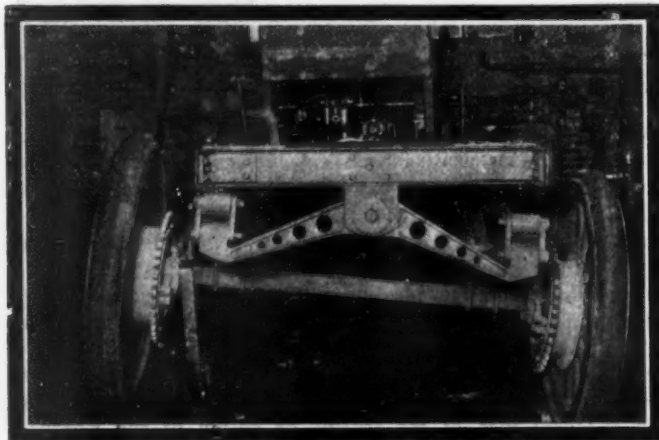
Rear spring equalizer on the Harder truck, showing a level platform with one wheel out of contact with the ground
